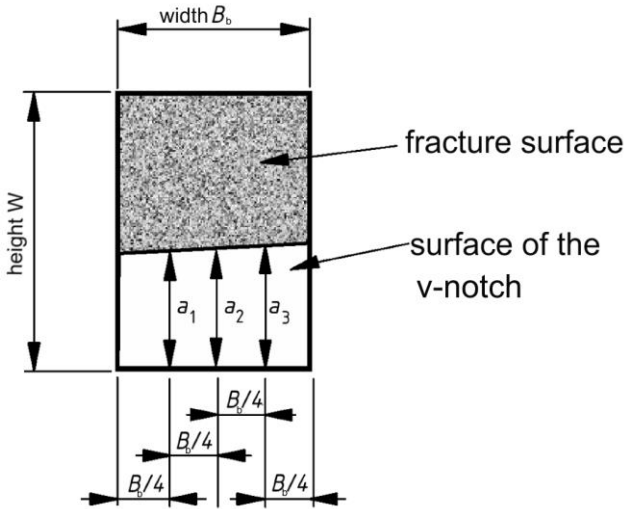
Schematic of a fractured specimen with dimensions and positions of a_1 , a_2 , and a_3 for determining the crack length (adapted from [89]).
